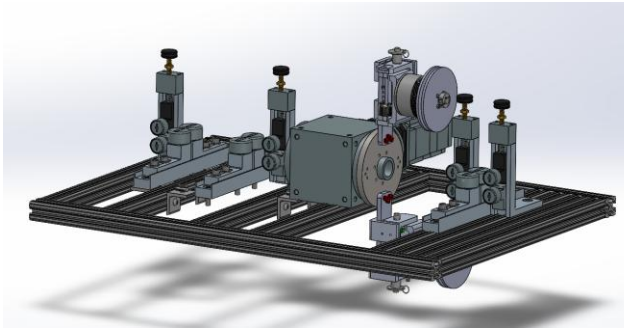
REBCO wrapping machine with custom T-slot frame final CAD model
